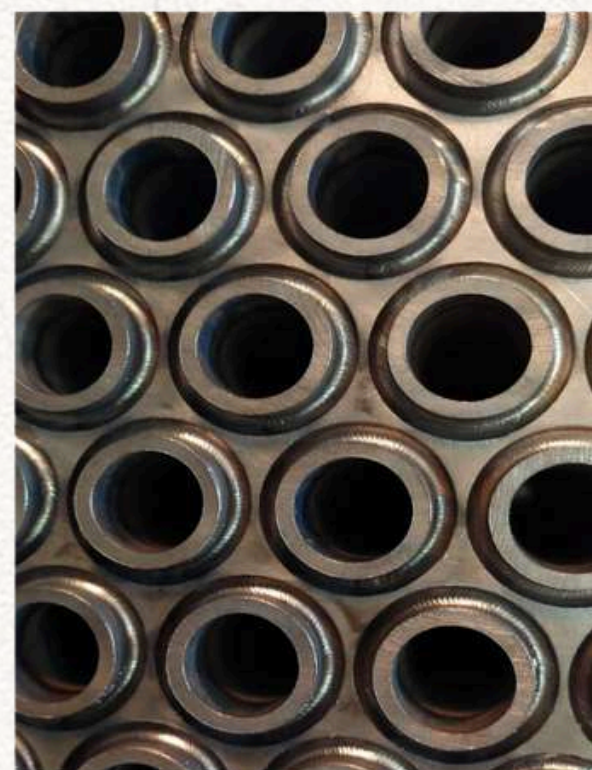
Orbital tube to tube sheet-Root weld
